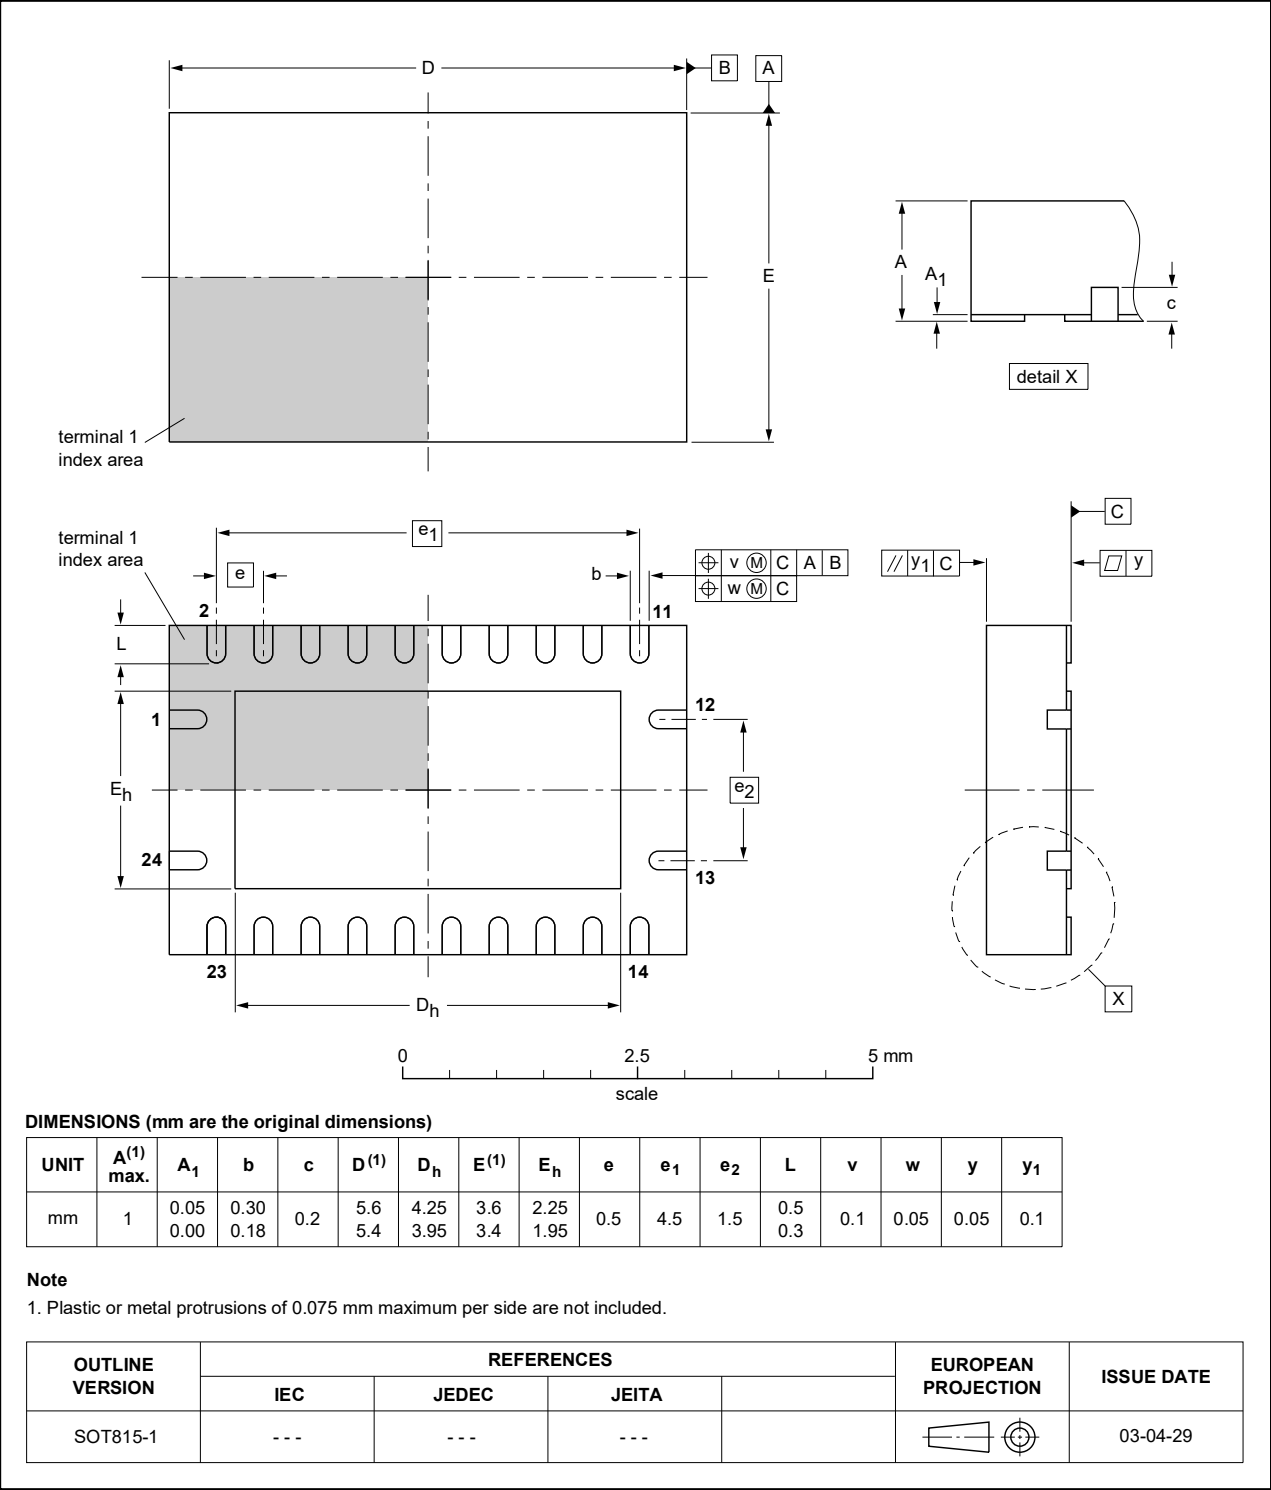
Package outline SOT815-1 (DHVQFN24)
